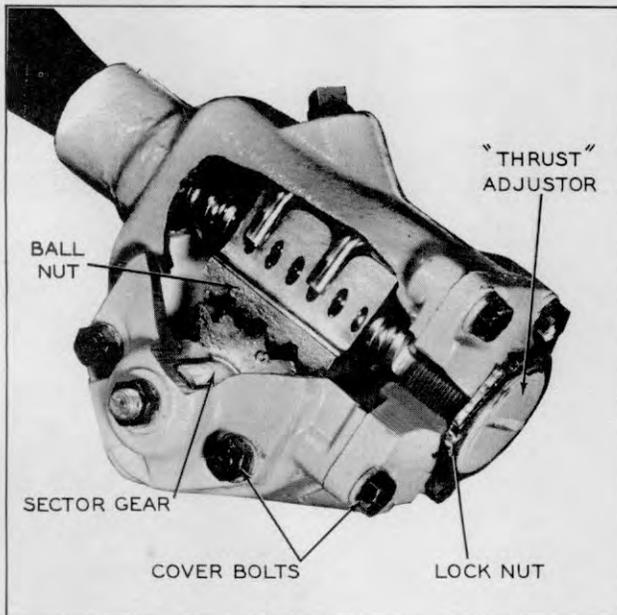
Steering Gear Thrust Adjustment (Worm Bearings)
